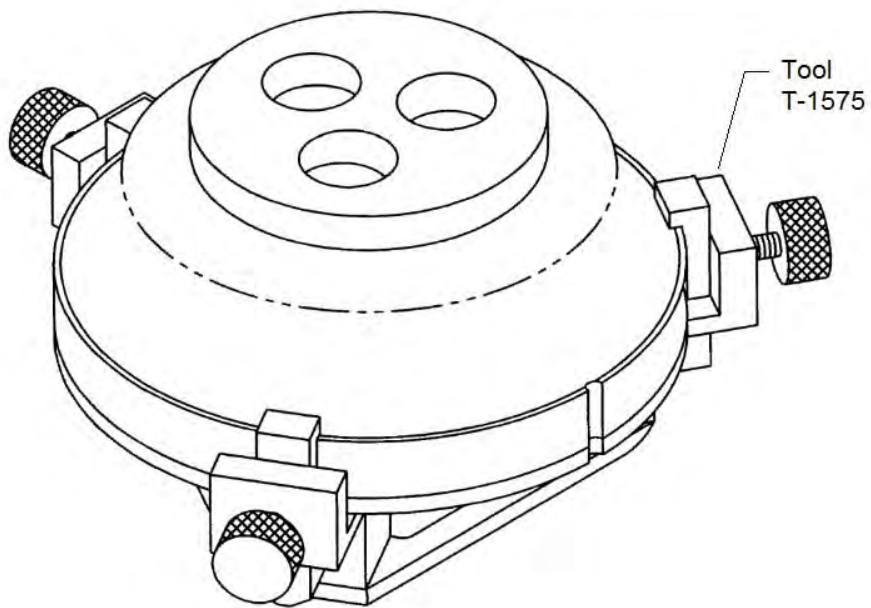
Installation of Swashplate Rigging Tool T-1575
